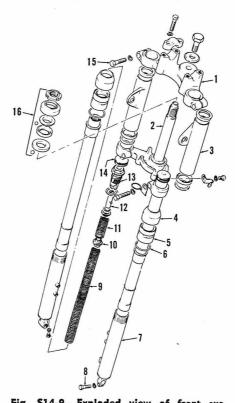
Exploded view of front suspension units common to 185cc models. Other units are similar but lack adjusting feature.
